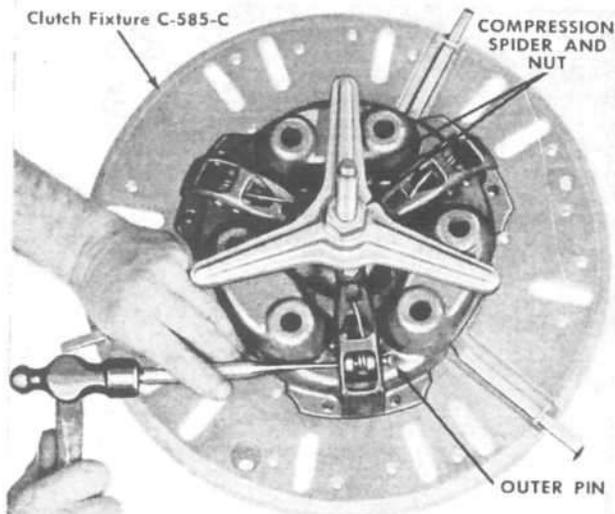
DISASSEMBLING ROCKFORD CLUTCH
